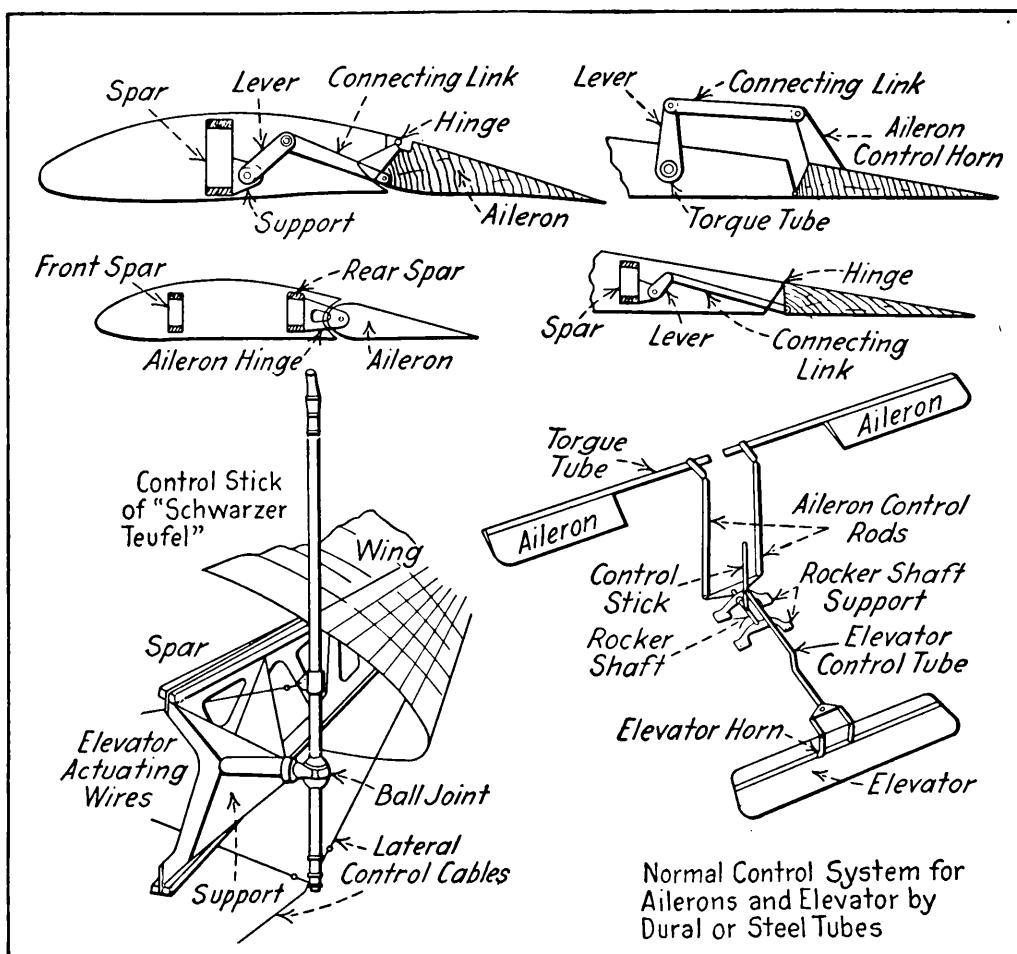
Details at Top Show Various Methods of Actuating Ailerons of Sailplanes. The View at Lower Left Shows Control Stick Supported by a Ball Joint. The Assembly at Lower Right Shows Method of Aileron and Elevator Actuation by Push and Pull Tubes.
